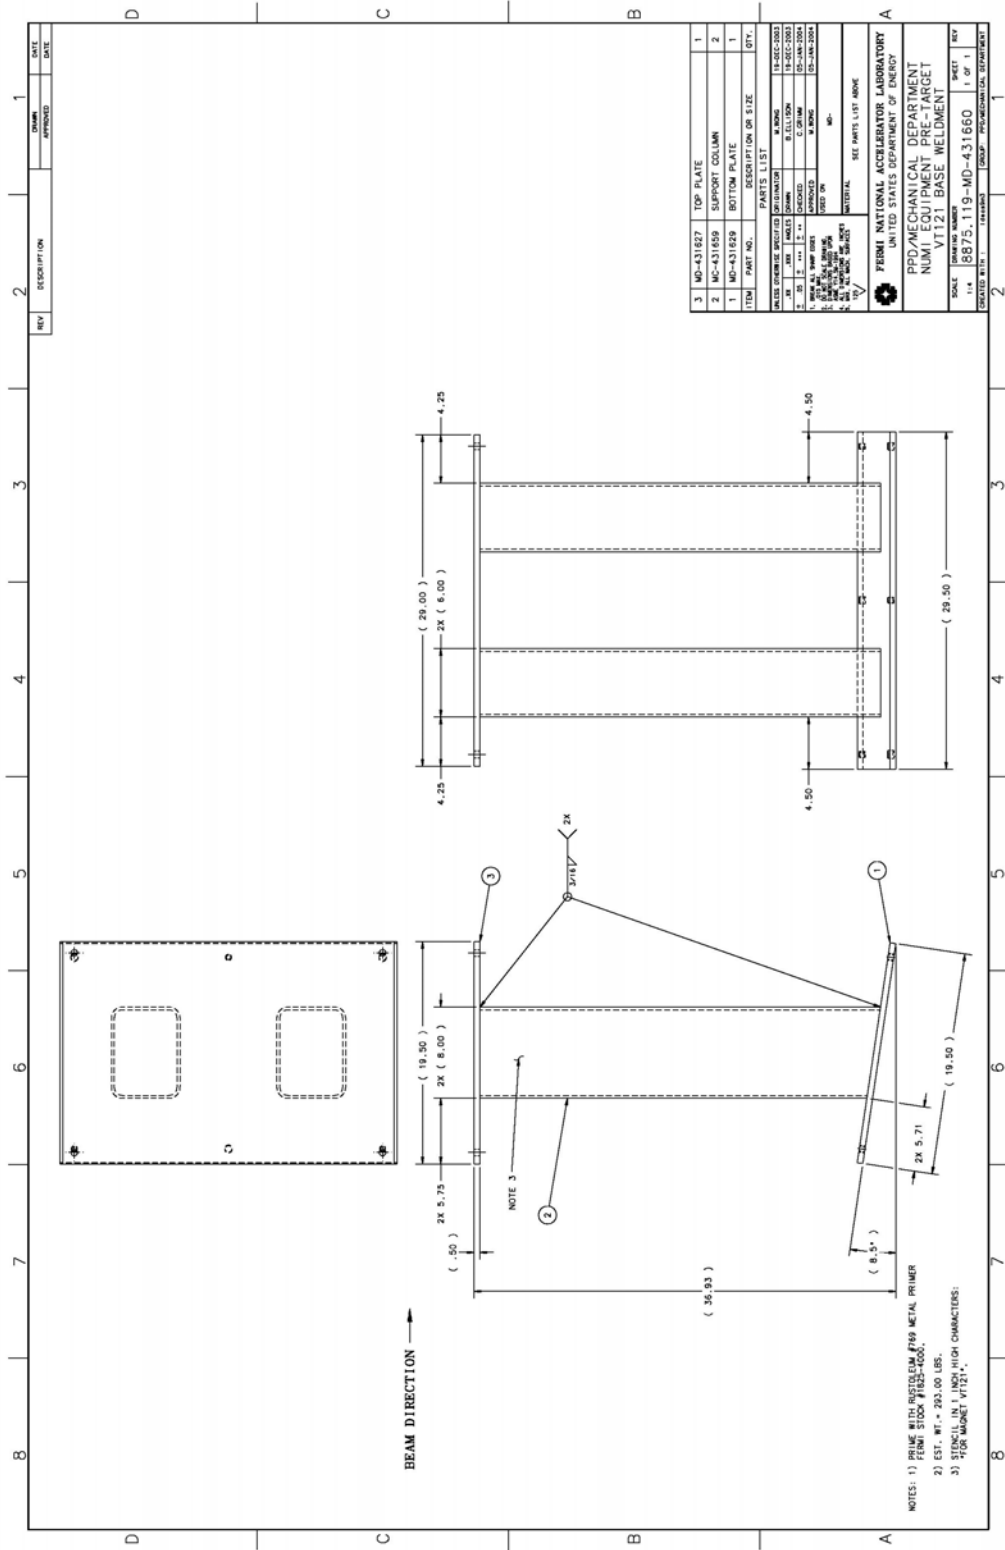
Typical Base Weldment (Drawing 8875.119-MD-431660)
